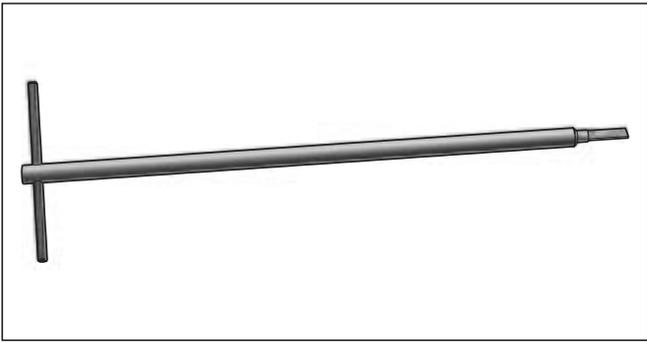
Bottom Alignment Tool in Threaded Post and Rotate to Desired Position
